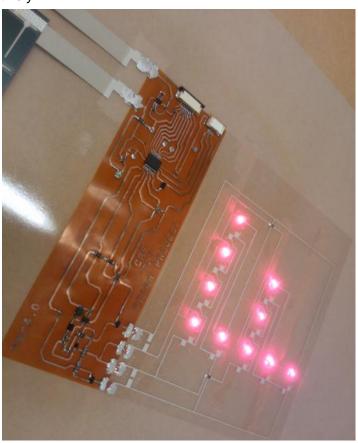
Partial view of the info panel backplane with electronic and lighting BBs assembled
